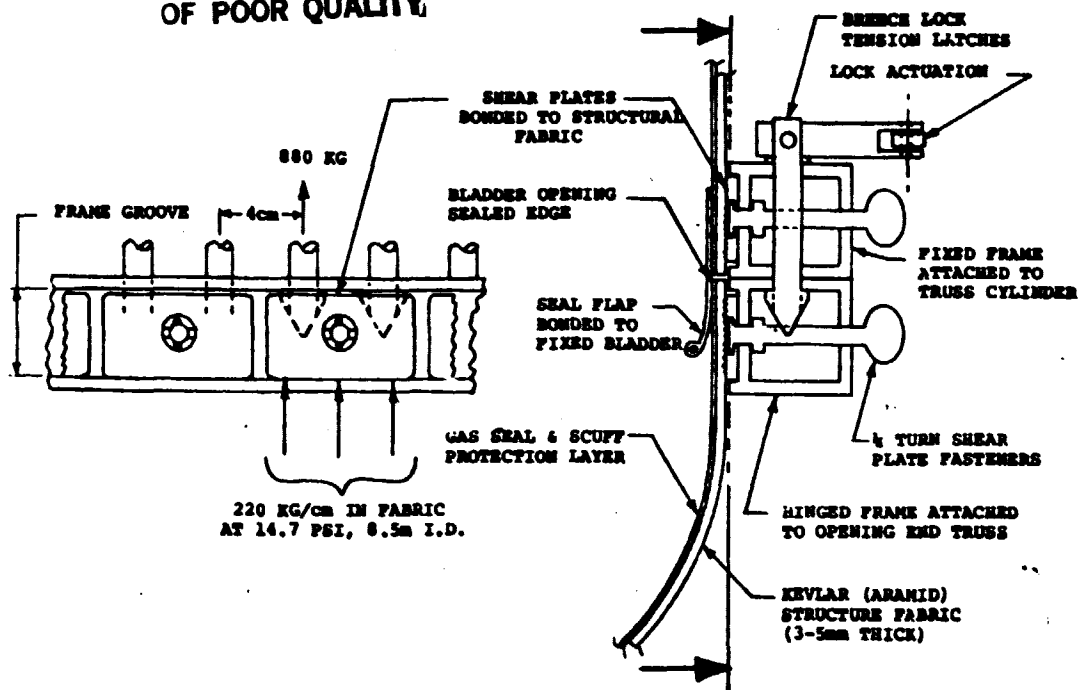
DETACHABLE BLADDER EDGE FOLDING FRAME
